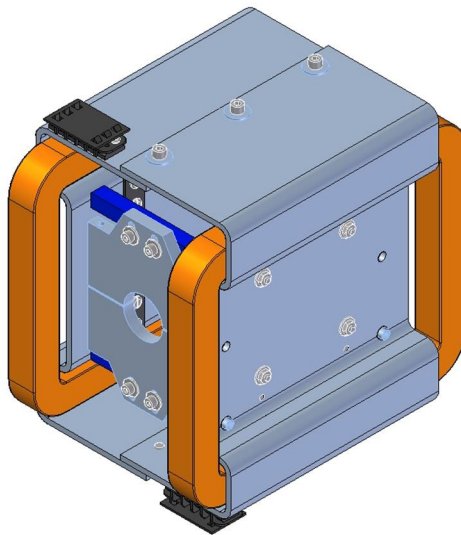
CAD Drawing of CLASS-4 Corrector Magnet
